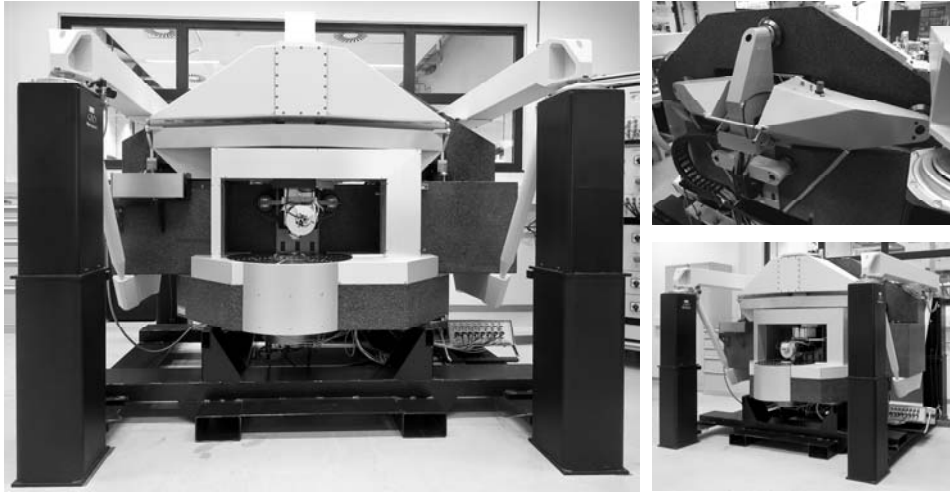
Motion system assembly (metrology system and probe already installed)
